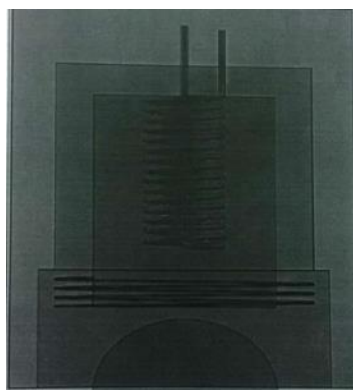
Assembly of Cavity Receiver Figure 2. Receiver machined from Aluminium Bar
